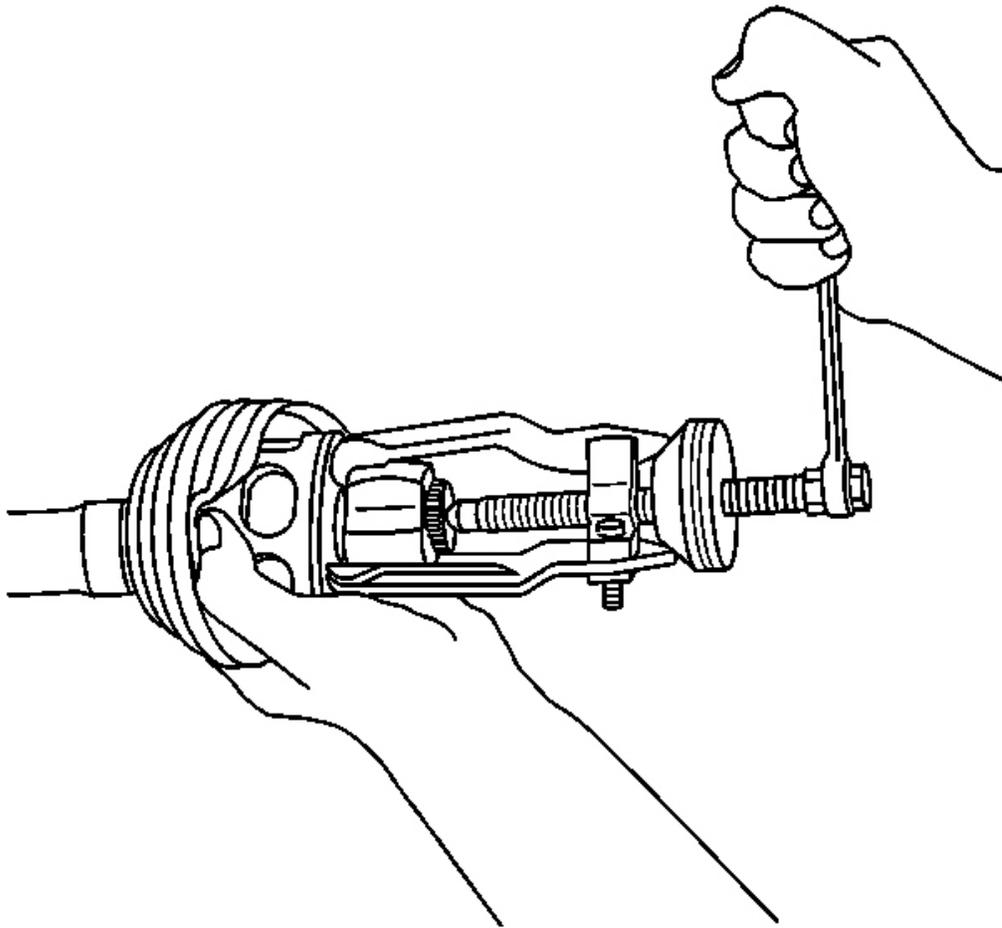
Removing The Inner Race From The Axle Shaft Using A 3 Jaw Puller
